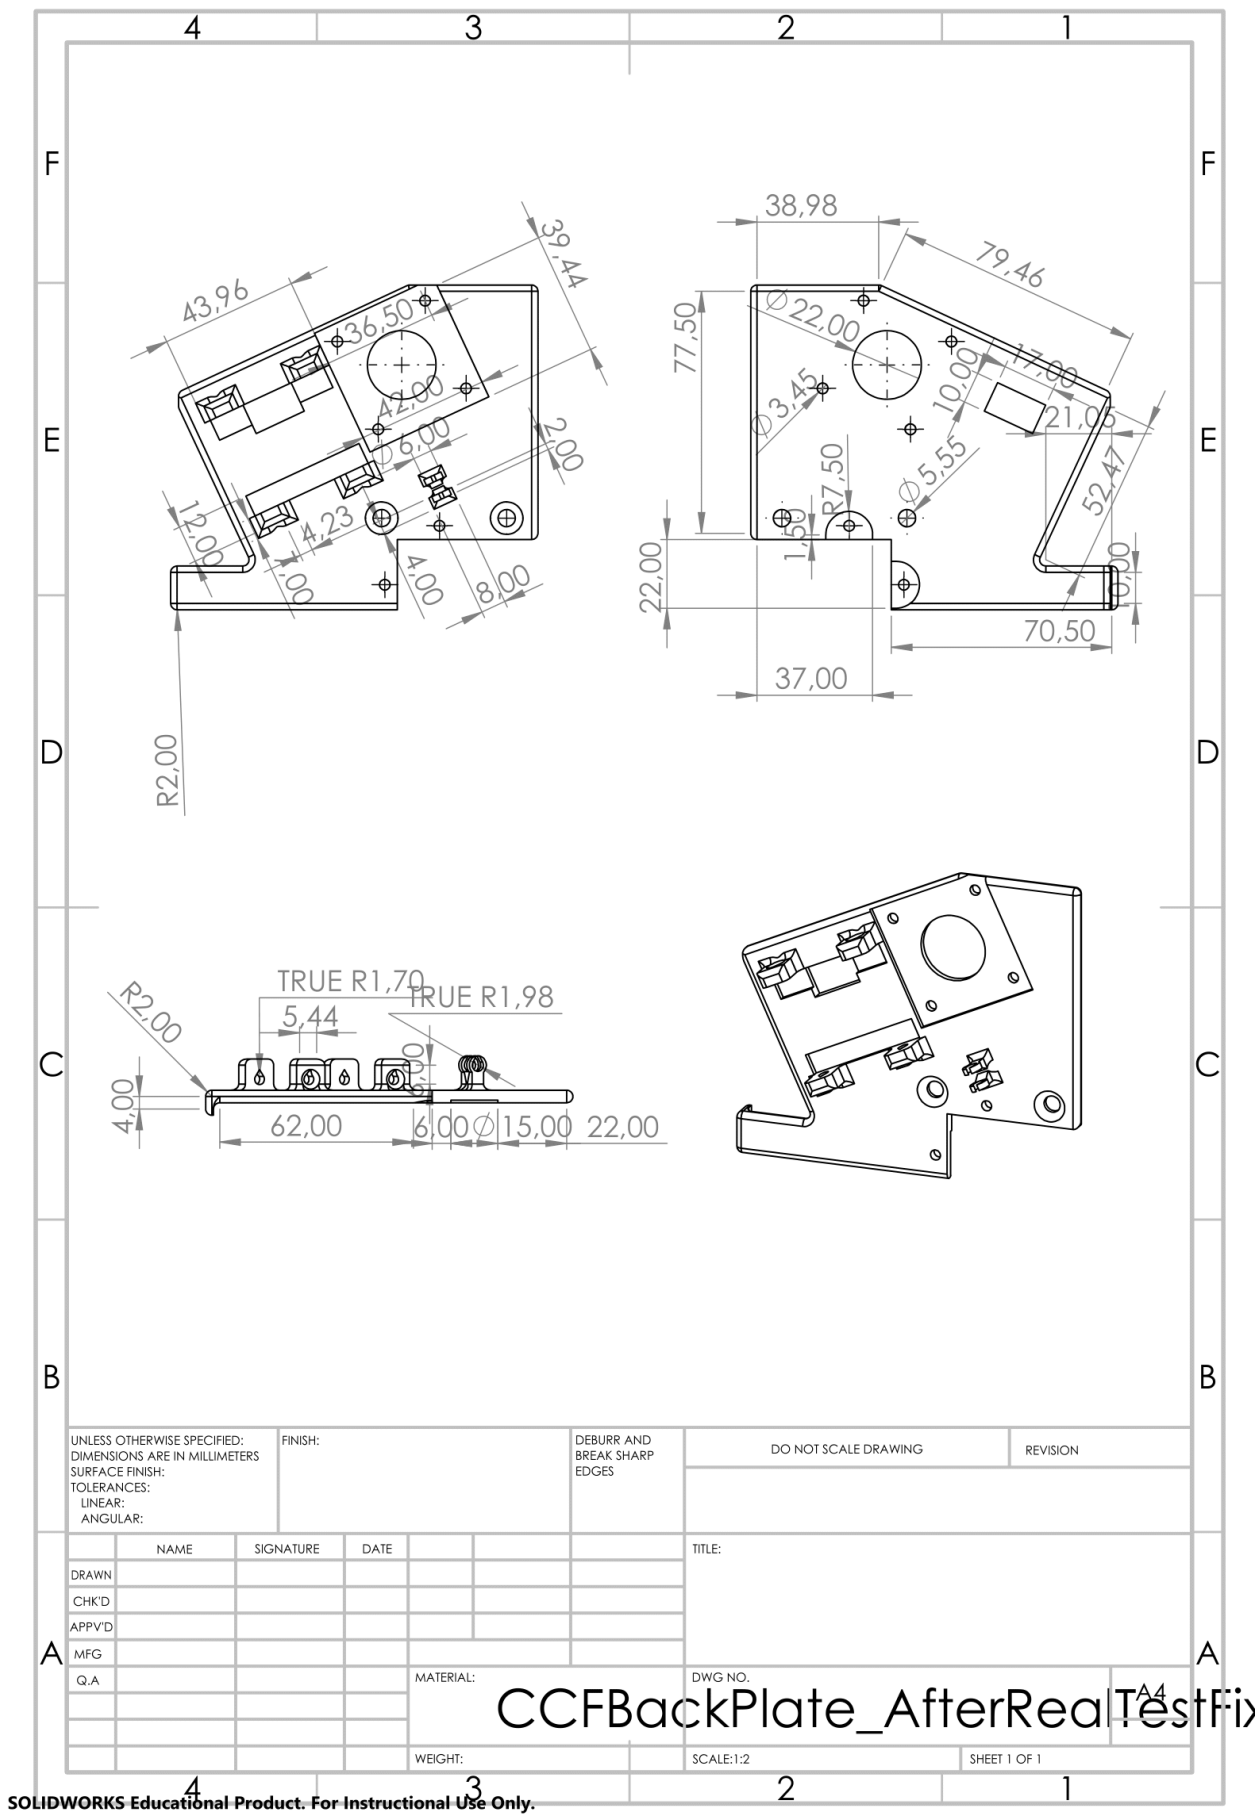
Backing plate housing the motors, cutting system and feeding system.
